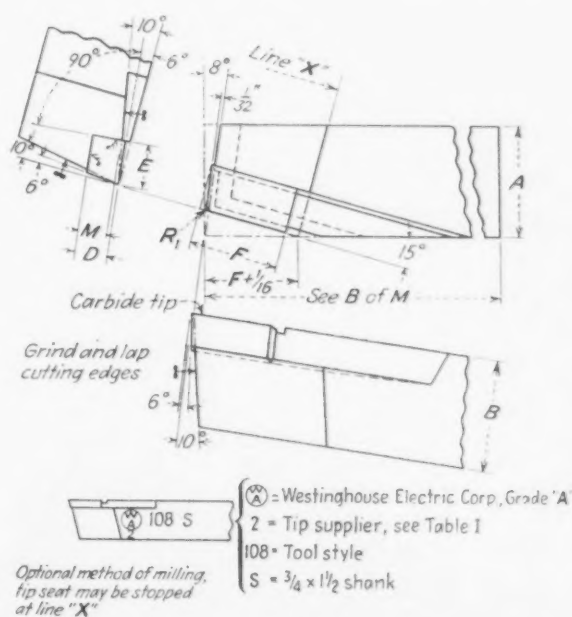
A general purpose tool used for cast iron but altered in design can be used for turning molybdenum. Shown here is the standard tool, and the modifications are described in the text.
